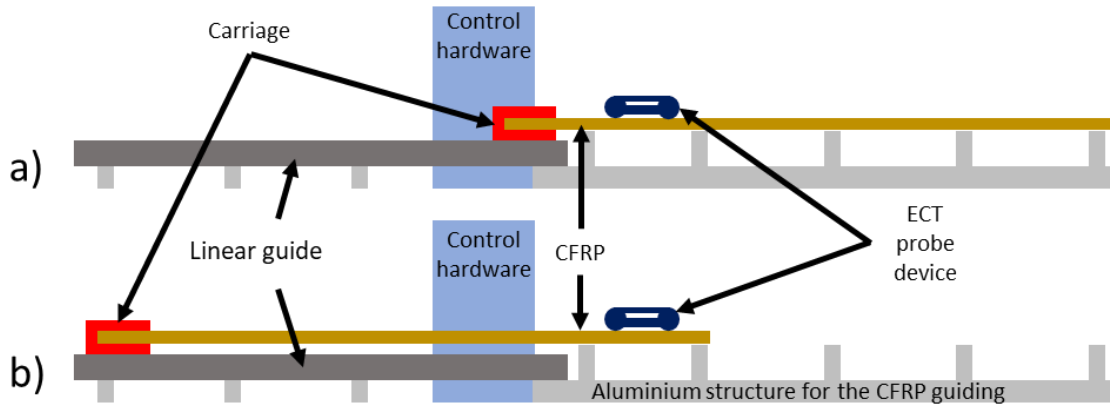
Schematic design of the high-speed inspection prototype (not to scale), a) before the inspection; b) after the inspection.
